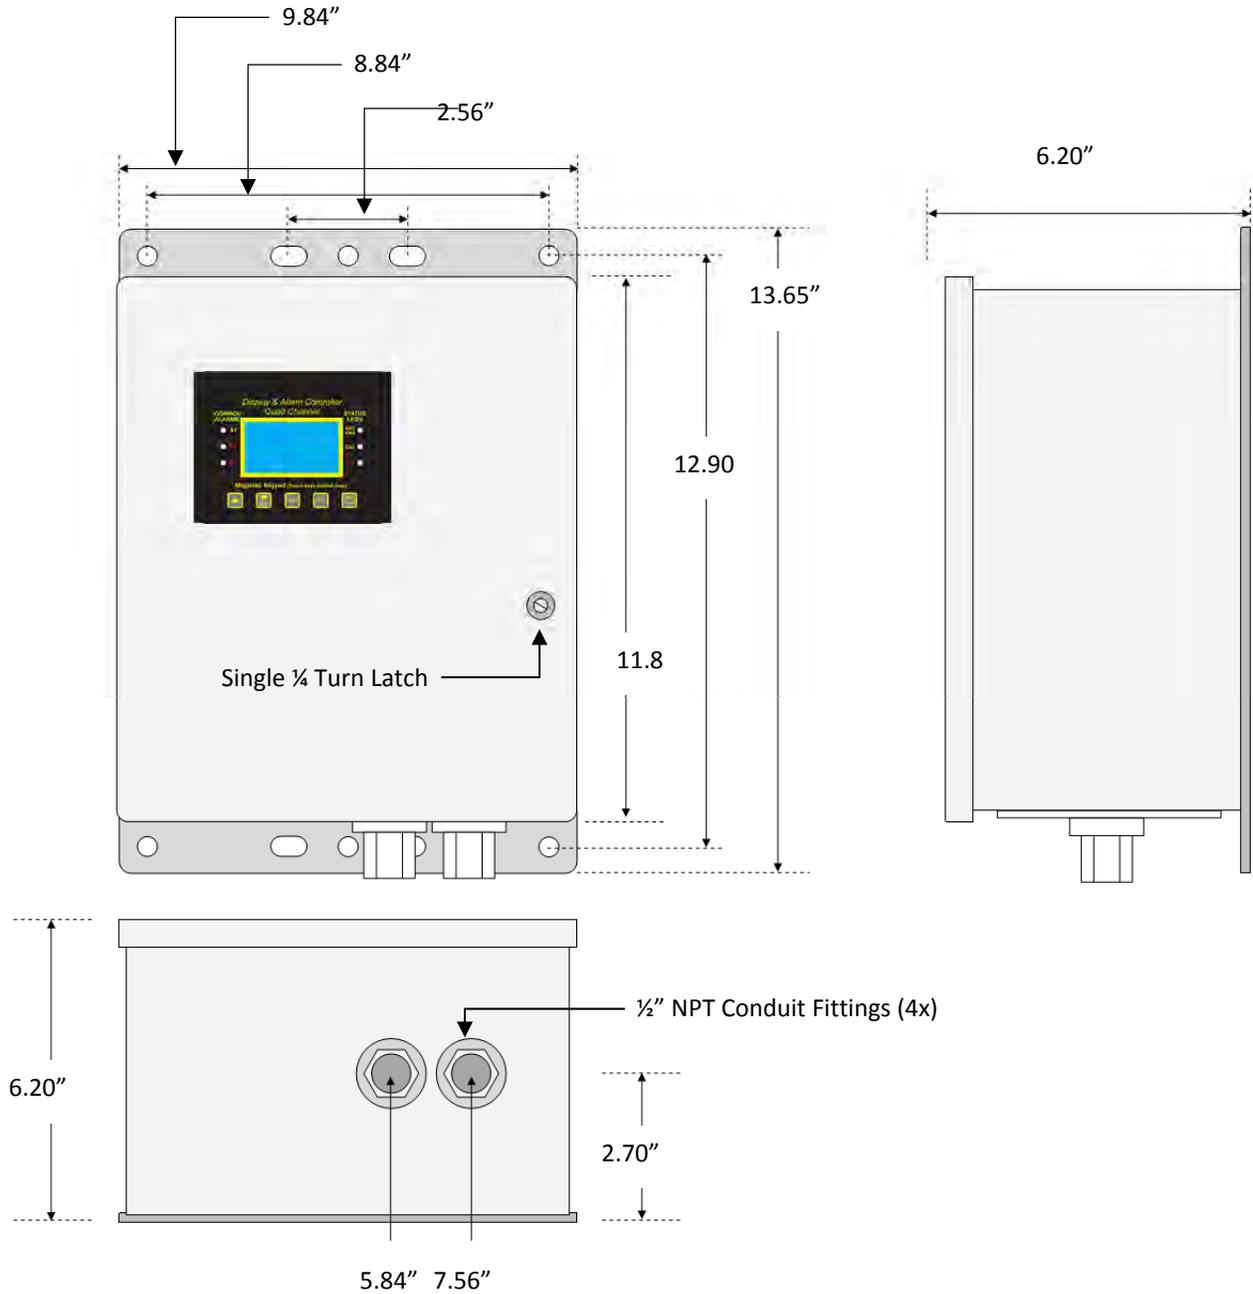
NEMA 4X Painted Steel Wall Mount
